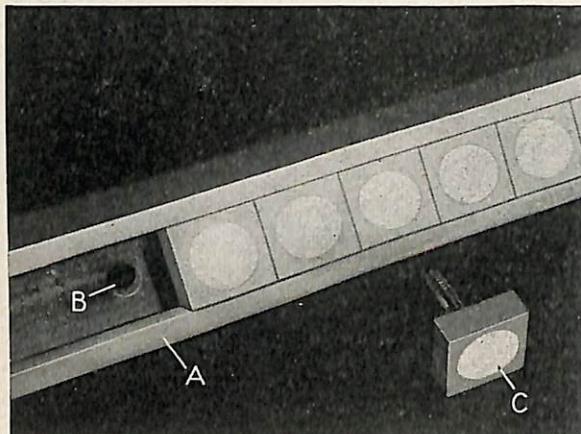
Part of the Length-bar Assembly used in the B.T.H. Electro-magnetic Positioning System for Machine-tables and Slides
